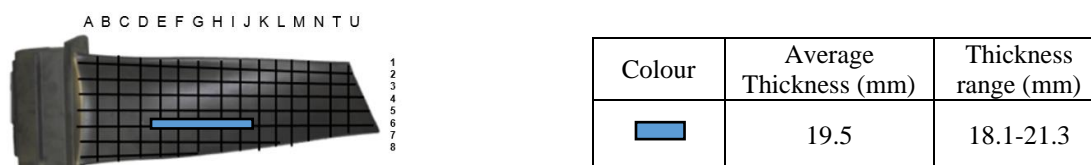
The location of samples that were solutionized at 1120°C for 1, 2 and 4 hours using Ar (180°C/min) and furnace cooling (20°C/min).
